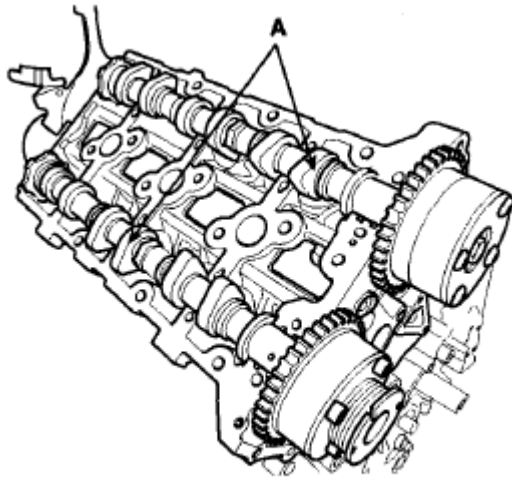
Identifying RH Camshaft Bearing Cap (A) And Thrust Bearing Cap (B)
